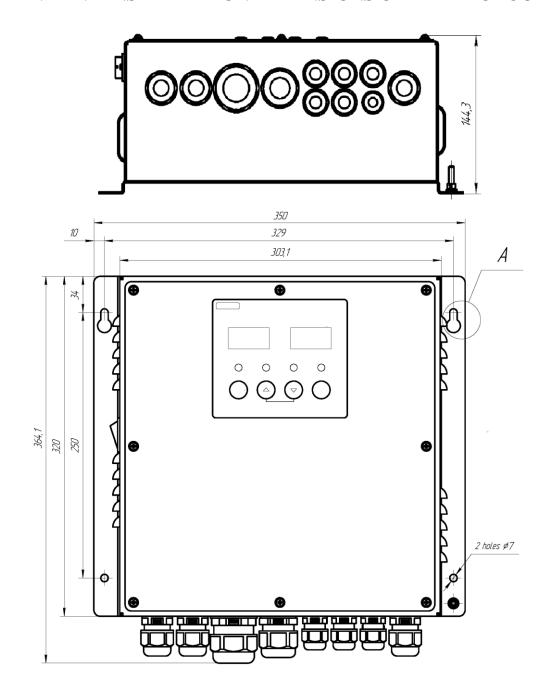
Outline and installation dimensions of the PCH with an integrated control panel
